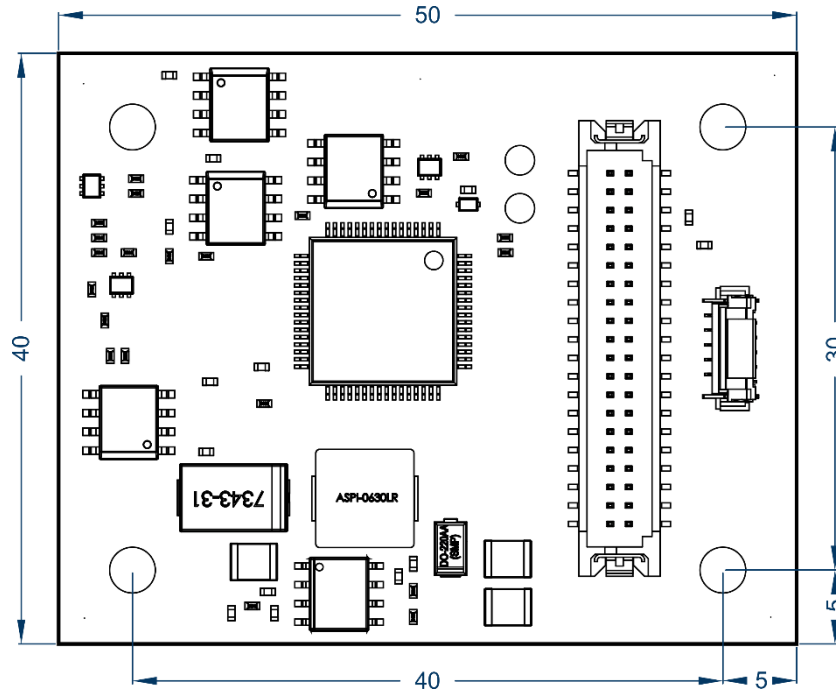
Verdin DSI to LVDS Adapter Dimensions(mm) - Top view
